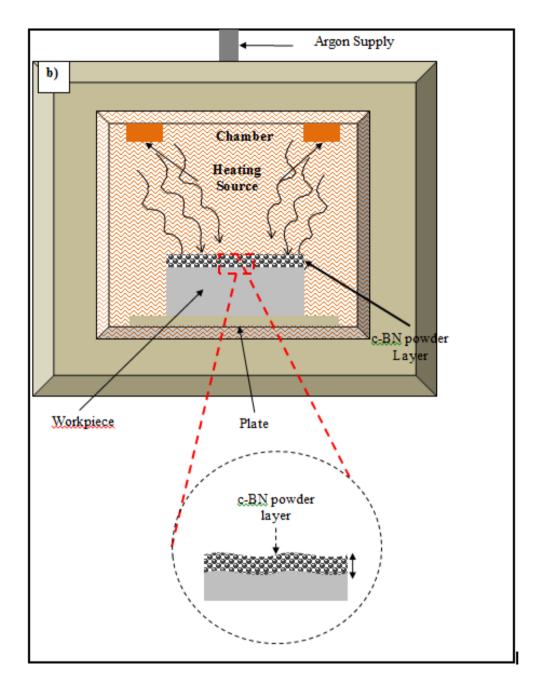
Schematic representation of diffusion mechanism of c-BN on D2 Steel surface via vacuum furnace
